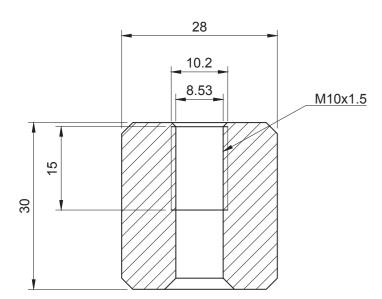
Piston with hole throughout its body, making sure it can be cleaned. (mm)
